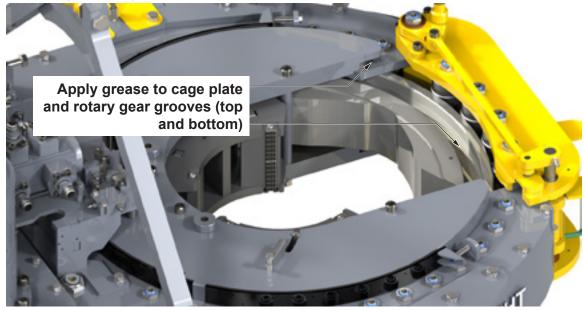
Cage Plate/Rotary Gear Groove Lubrication
